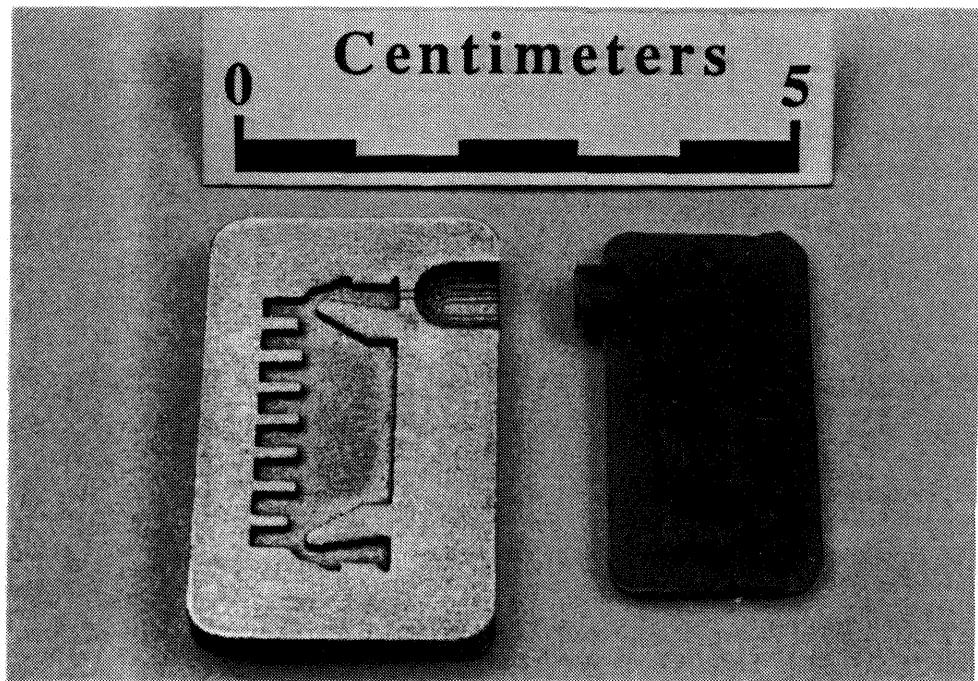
A Tooling Insert and an Injection Molded Polypropylene Part.
